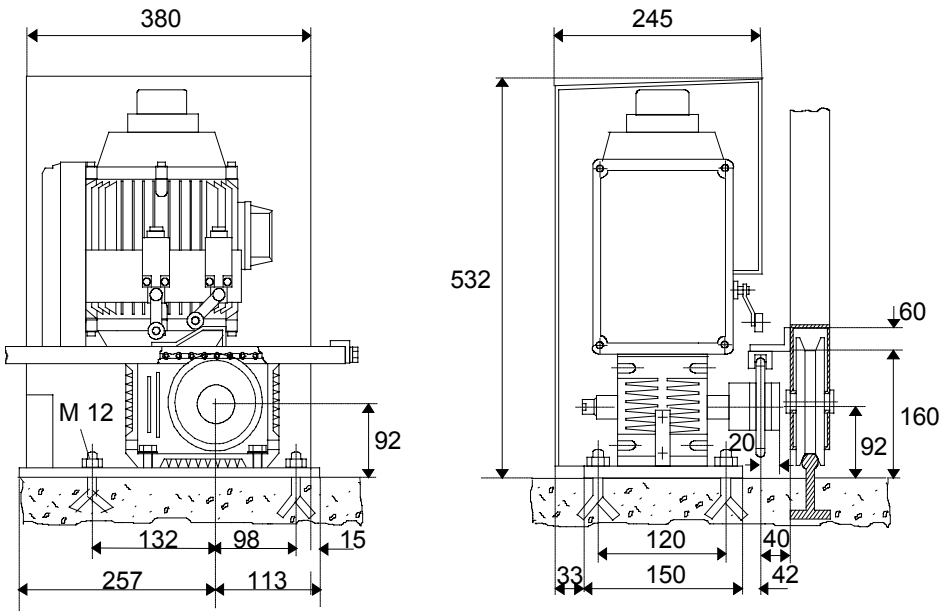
Dimensional drawing for type DS 1200 with chain guide and sprocket
